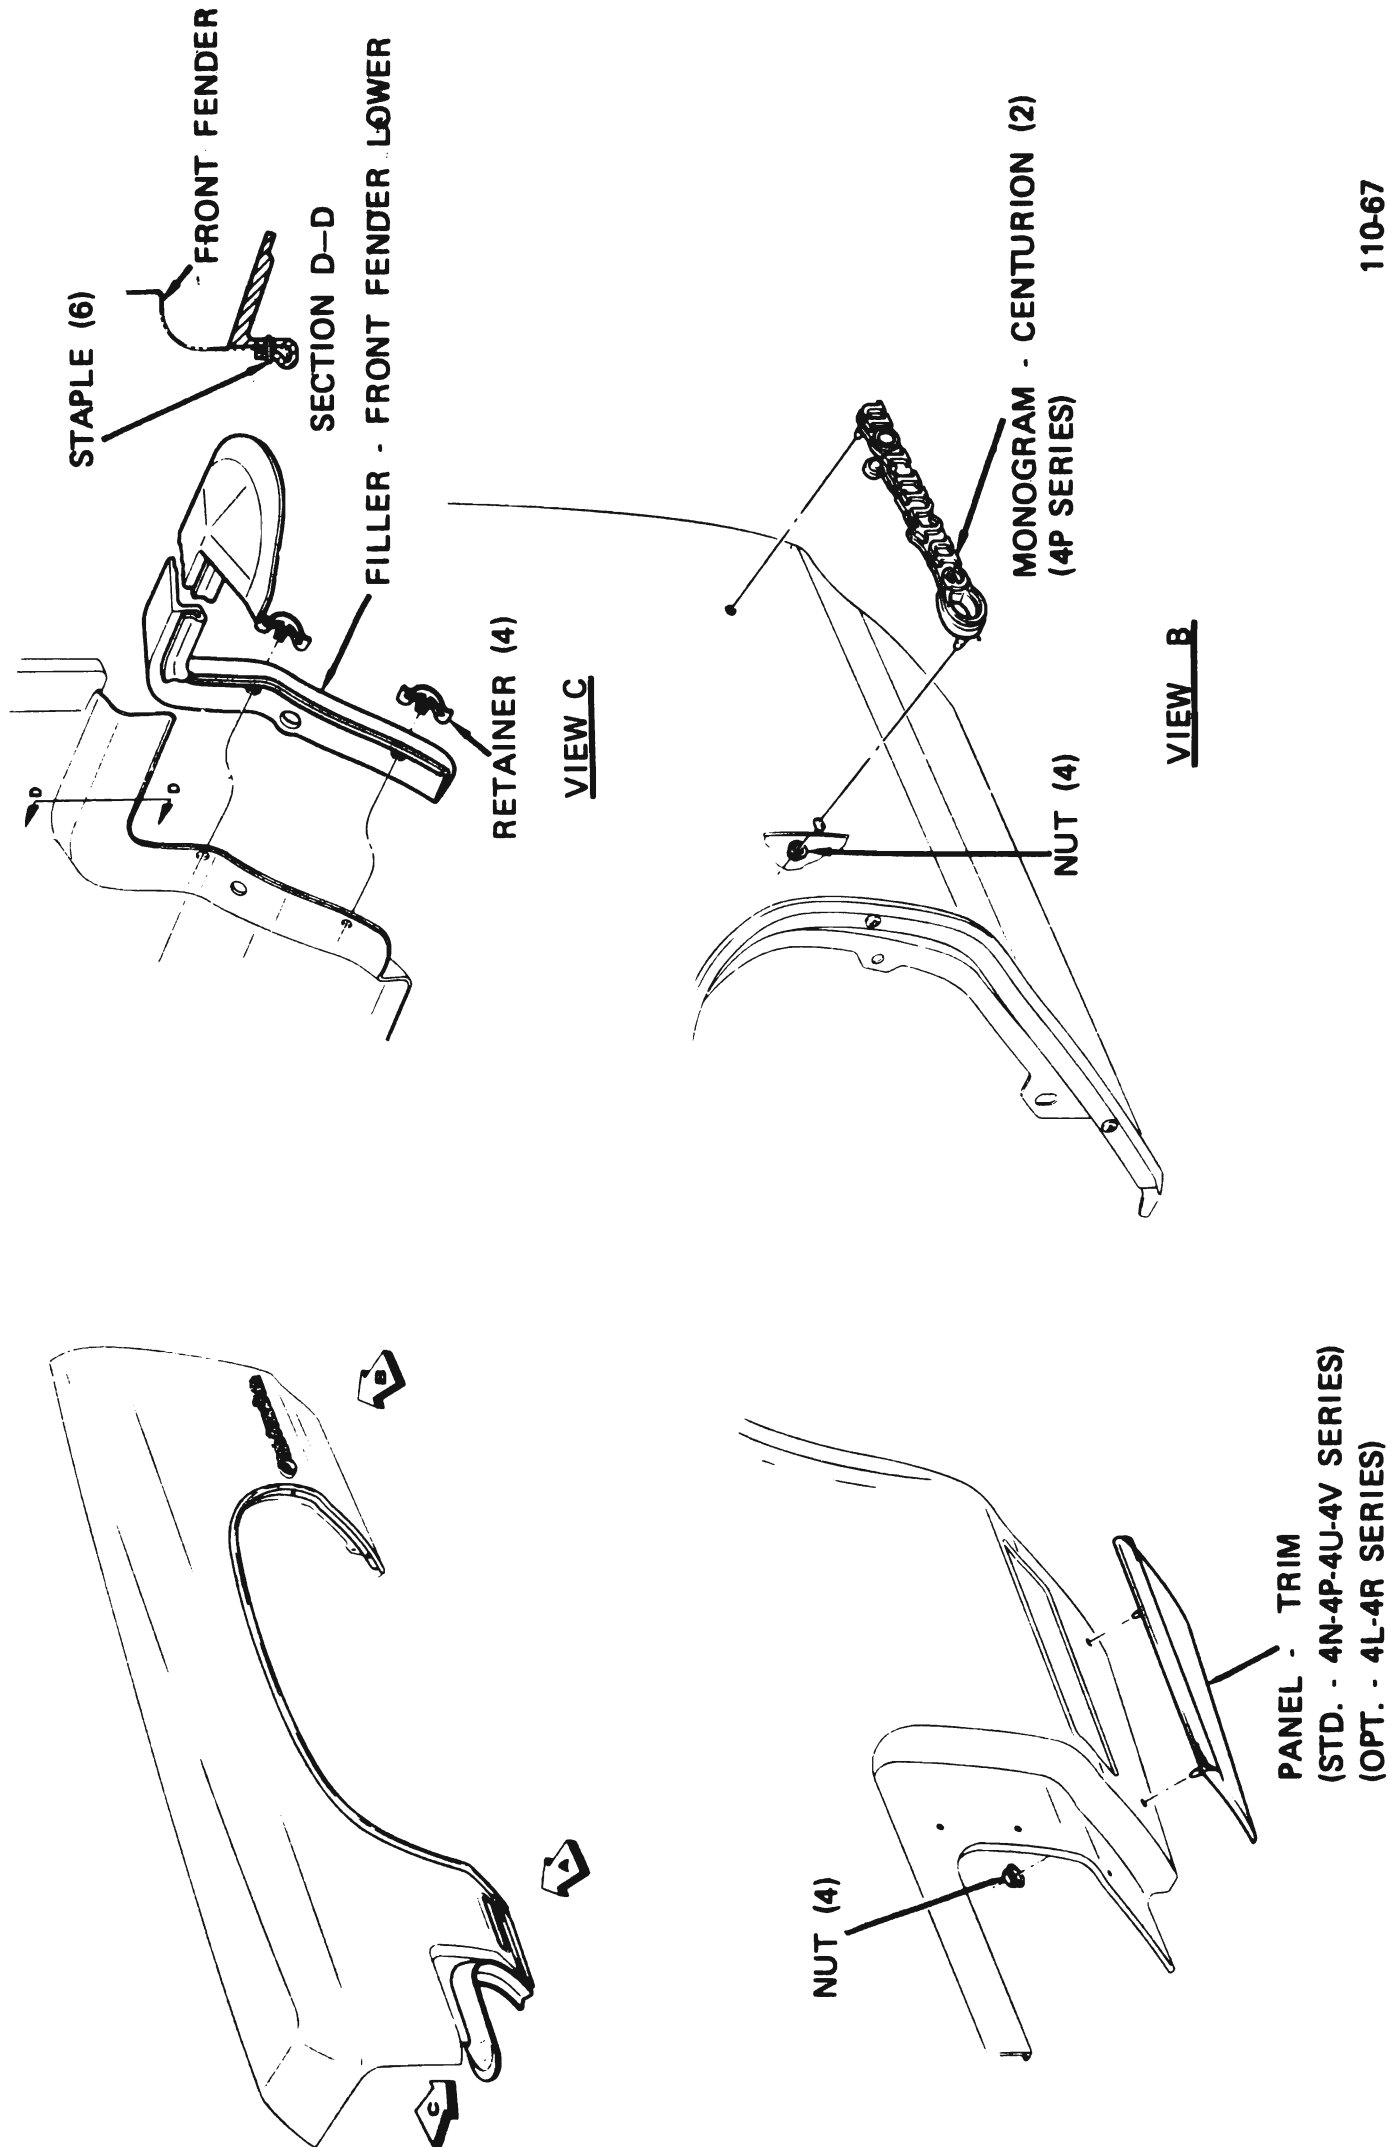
4L-4N-4R-4P-4U-4V Front Fender and Wheelhouse Assembly to Radiator Support Assembly
